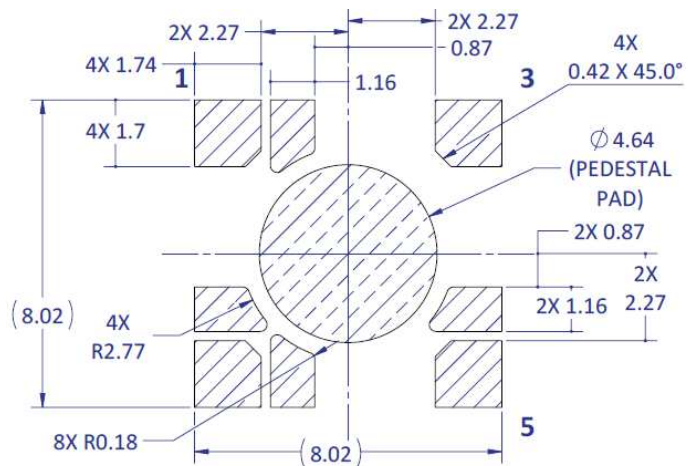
Recommended solder pad layout for anode, cathode, and thermal pad for non-pedestal and pedestal design
